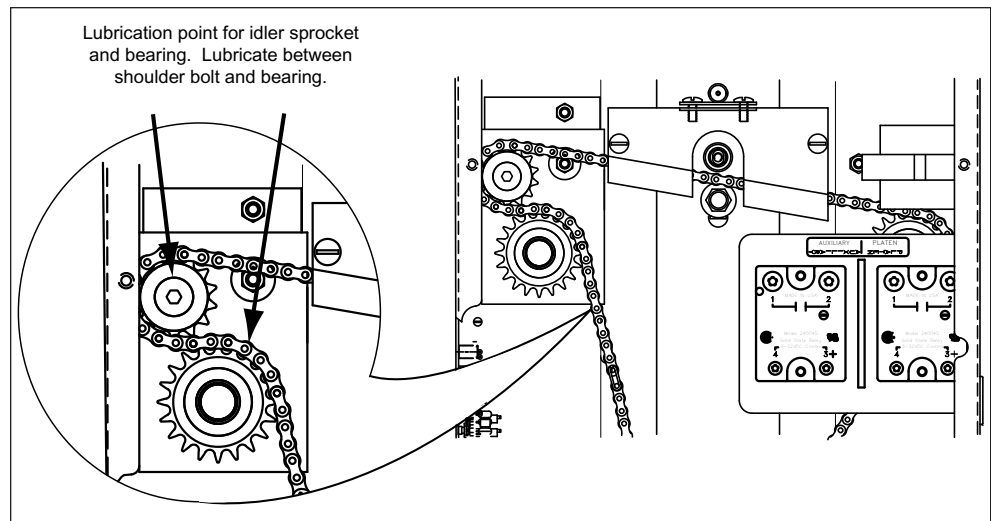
Lubricating the Drive Chain and Idler Sprocket Bearing
